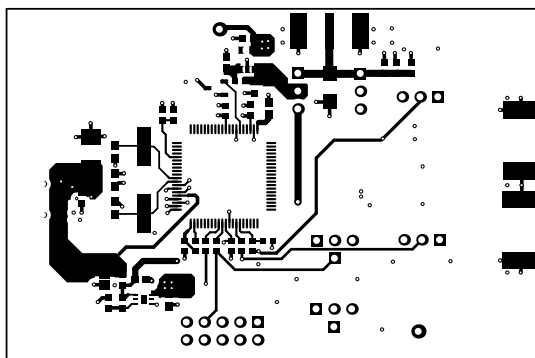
Layer 4 (Bottom Side, View From Bottom)
